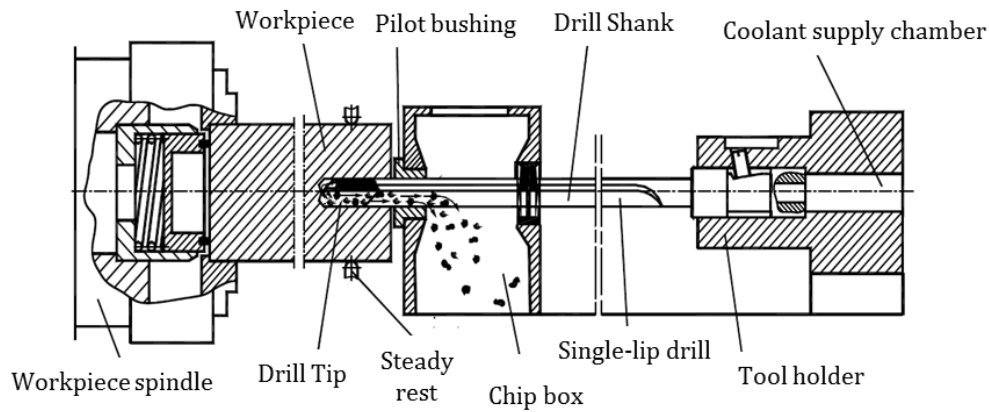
Single-lip deep hole drilling machine set-up [5]
